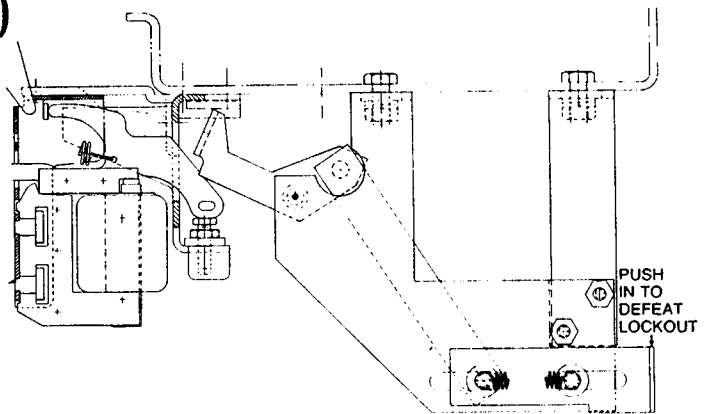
ELECTRIC LOCKOUT DEVICE
